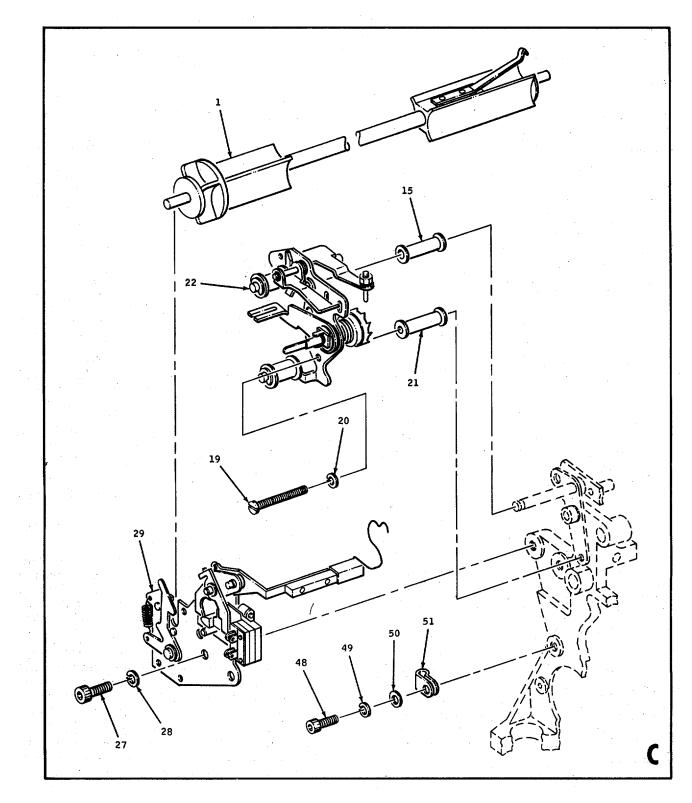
Right and Left Ribbon Feed and Low Paper Sensing Mechanisms, Exploded View (Sheet 3 of 3)
